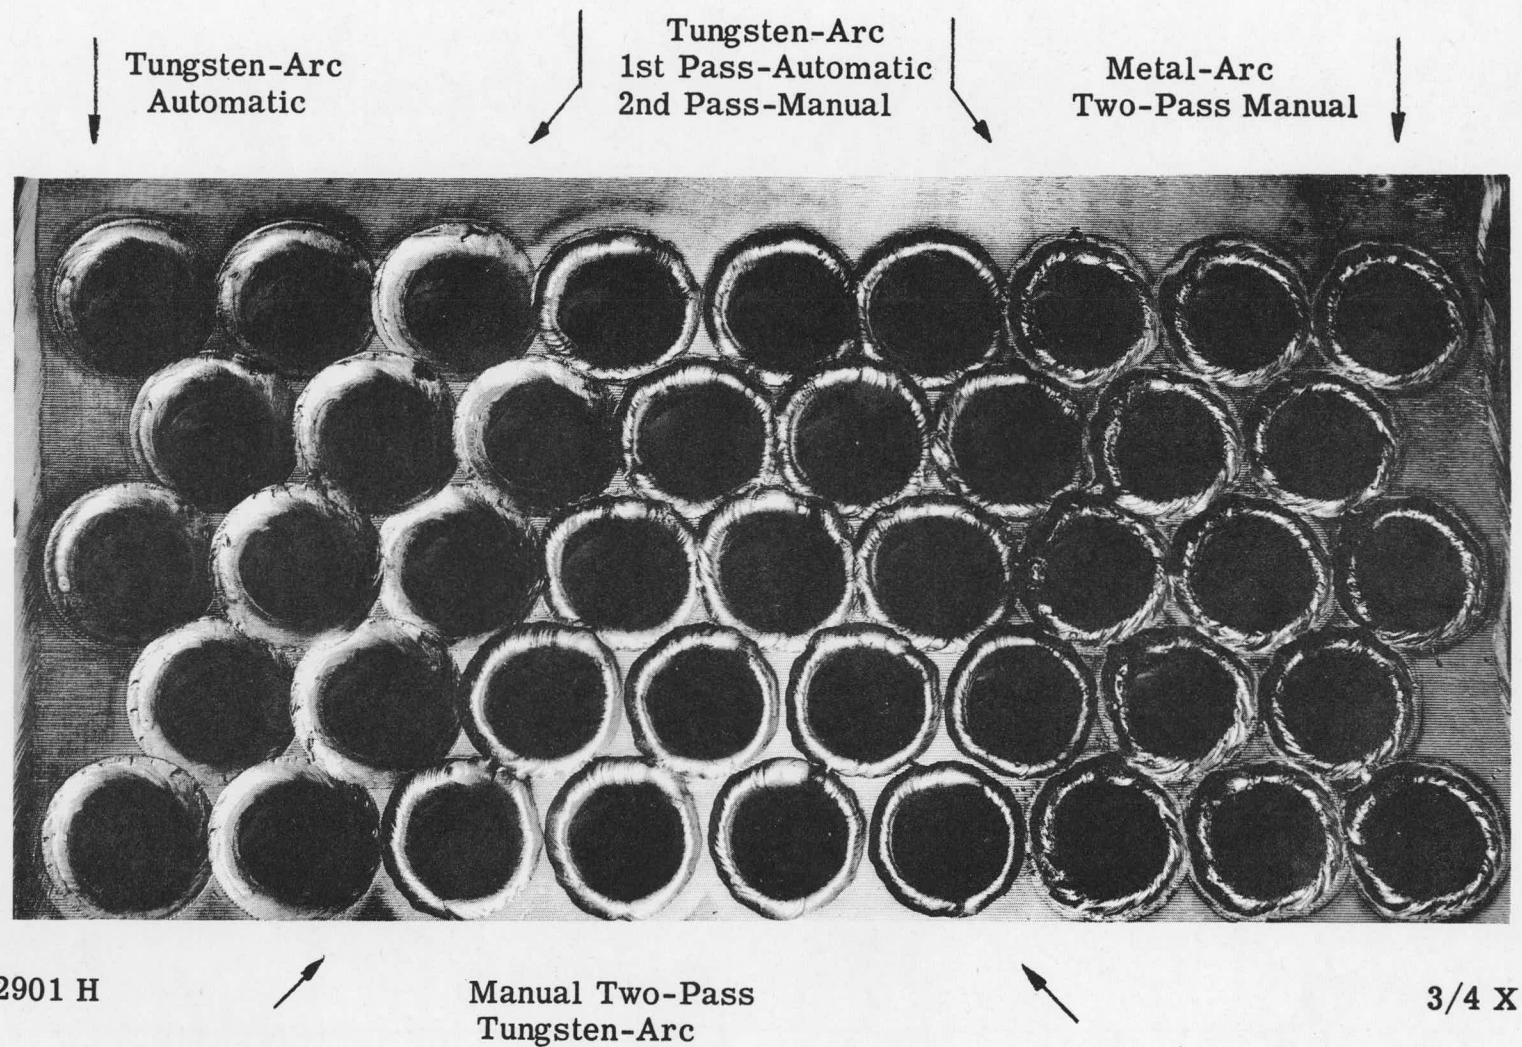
Surface Appearance of Welded Tube Joints Made Using the Tungsten-Arc and Metal-Arc Processes. This Sample Was Used for Thermal Cycling Tests.
